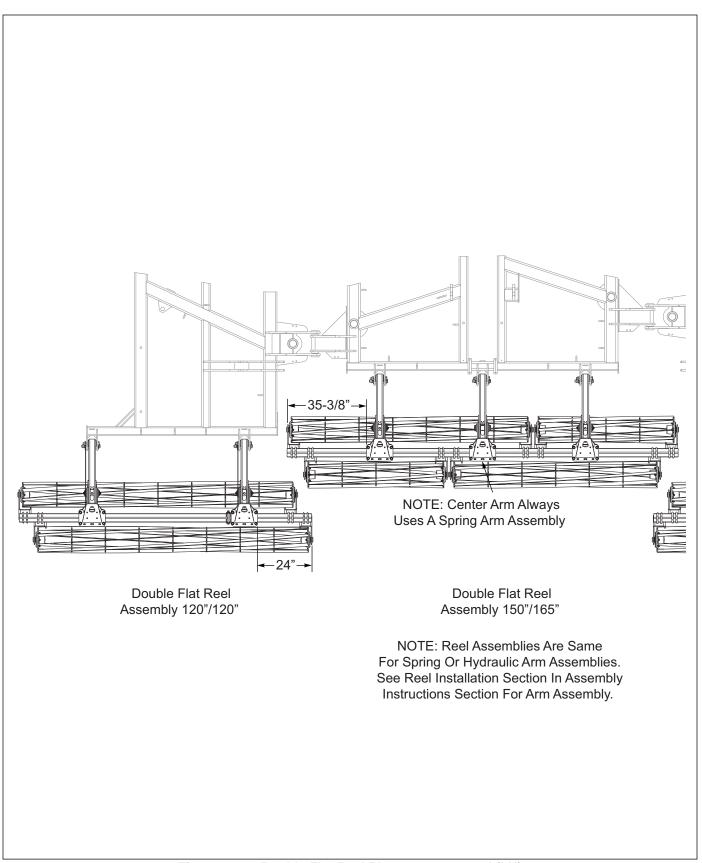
Double Flat Reel Placement 7531-32' (LH)
